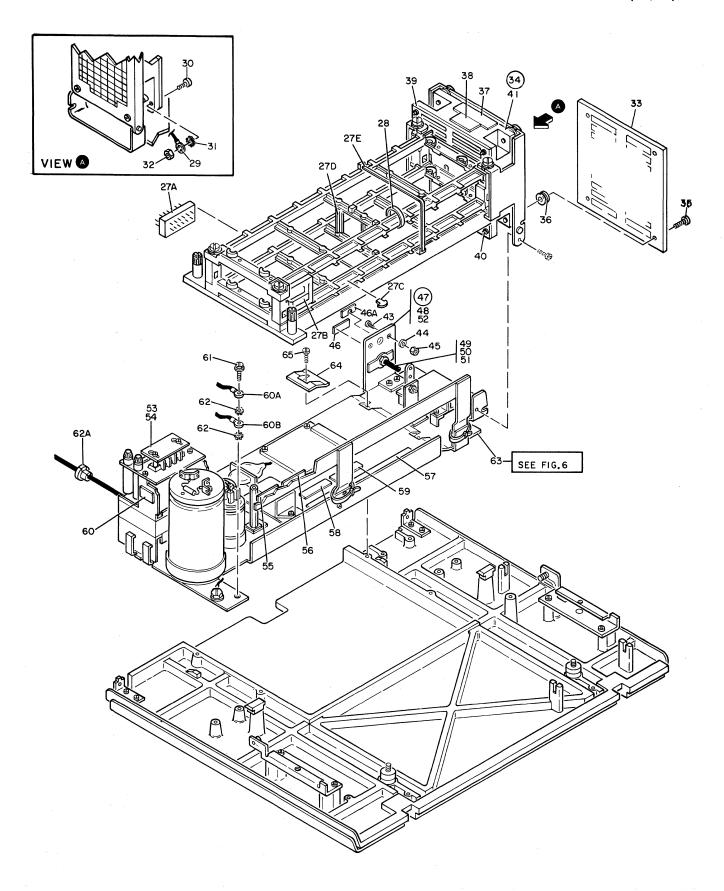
FINAL ASSEMBLY-PRINTER TERMINAL. SHEET 2 OF 2. INDEX NOS. 27A-65. SEE LIST 3.
